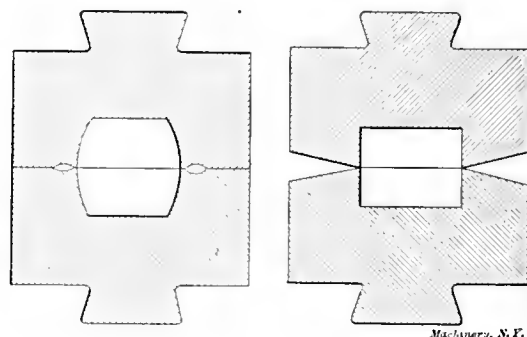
Stripping Die for Removing Fin produced by Forging Process, and Work for which it is used.
